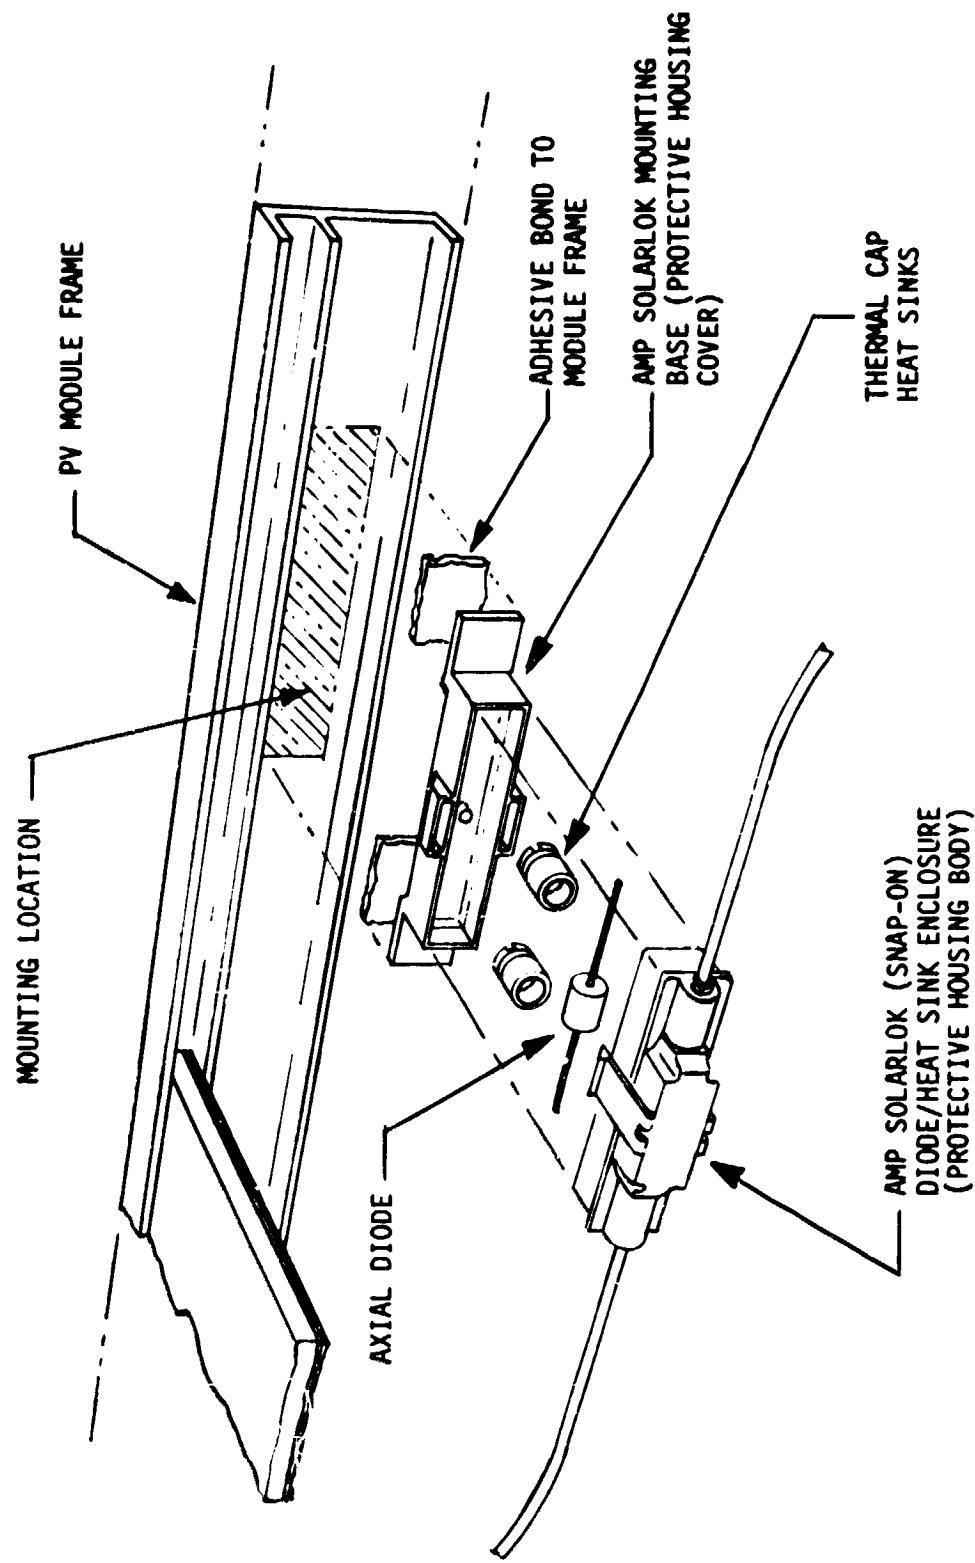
Axial Diode Package Mounted to PV Module Frame
